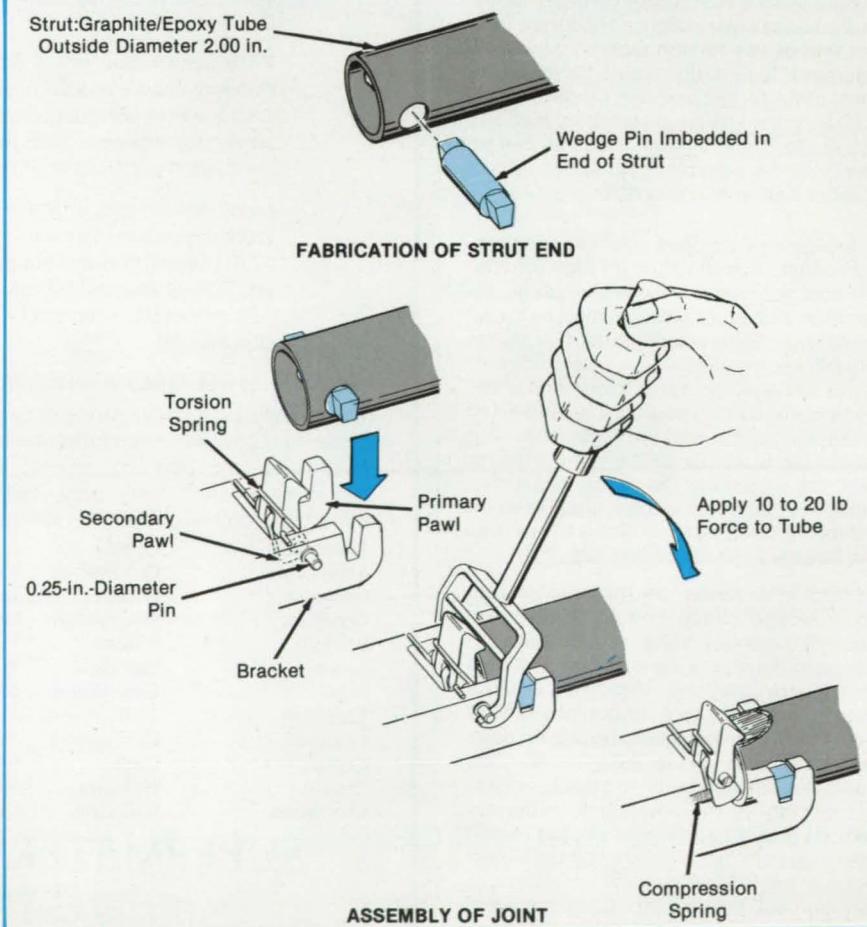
This Joint Would Be Assembled Rapidly by seating the wedge pin in the V-shaped slots and deforming the end of the strut until the primary pawl engages it.
